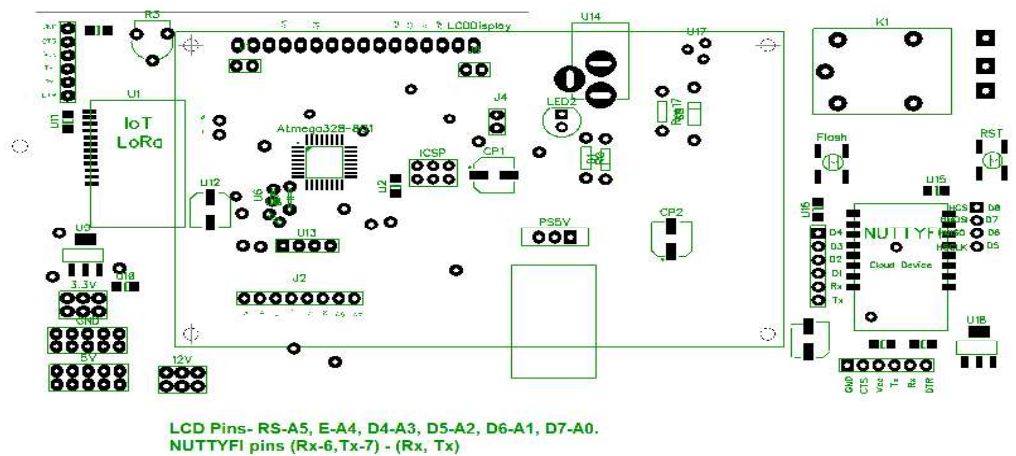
PCB layout of LoRa Gateway with Hooter
